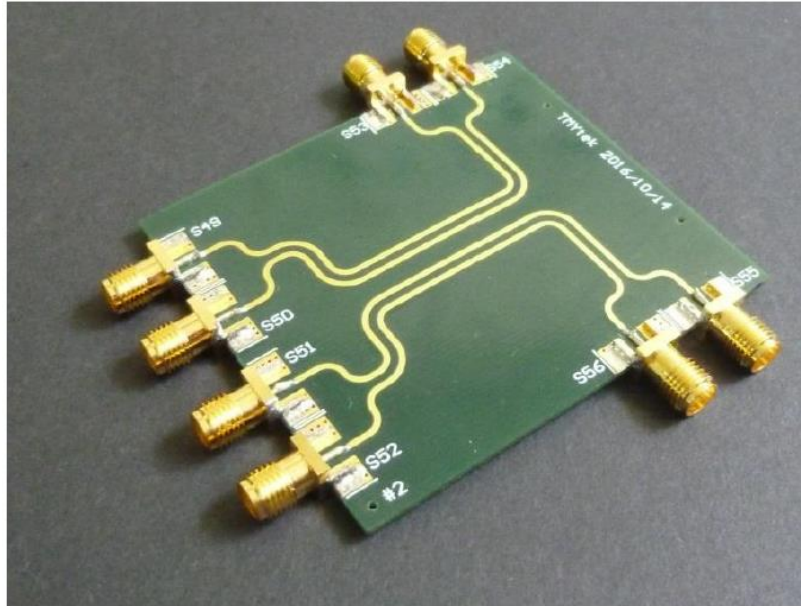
Fixture #2 with SMA end-launch jack mounted
